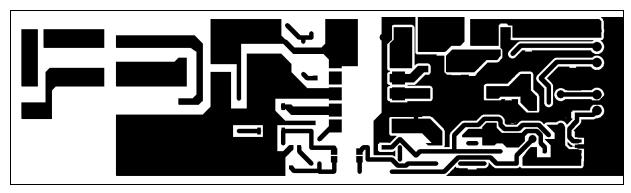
PCB Copper Layout (viewed from above), approx 195mm by 50mm
